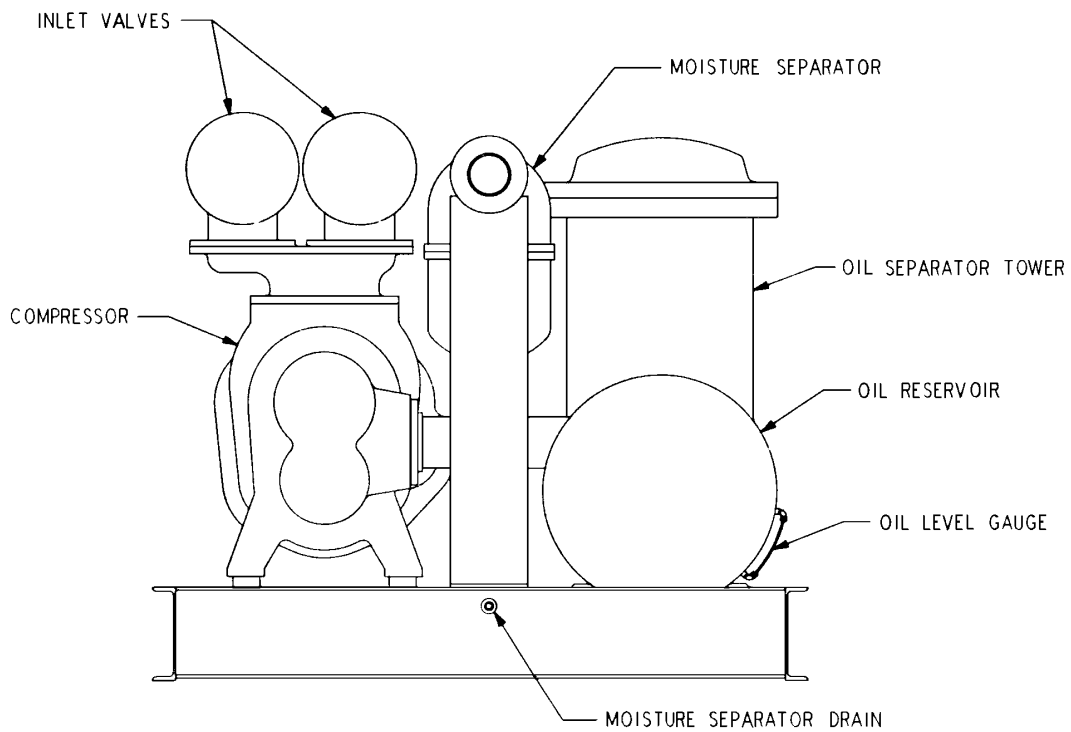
VIEW OF WATER COOLED UNIT WITH AFTERCOOLER (LESS ENCLOSURE) COMPRESSOR – RESERVOIR END
